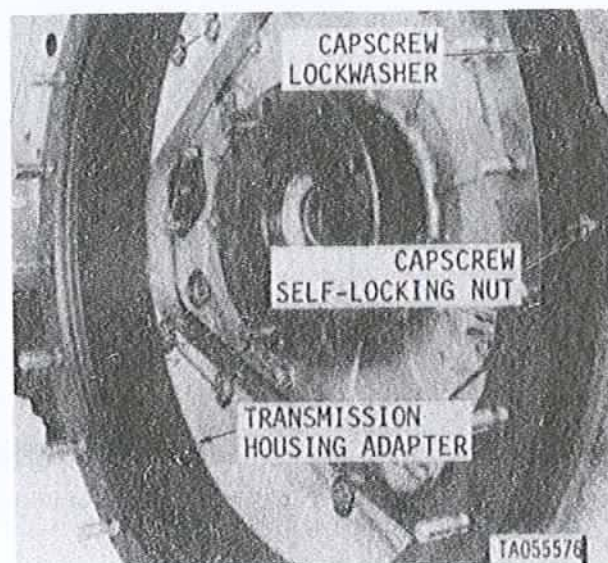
Removing or installing transmission housing adapter, model AVDS-1790-2DR engine.
